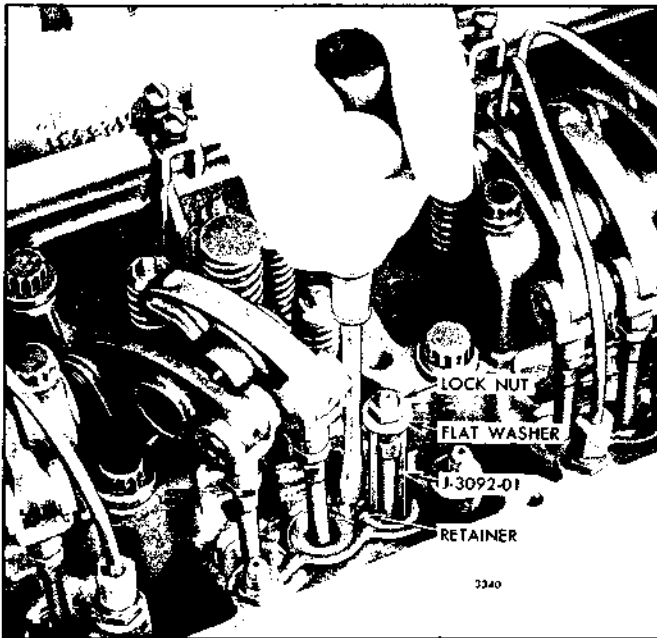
Removing Push Rod from Upper Side of Cylinder Head with Tool J 3092-01
